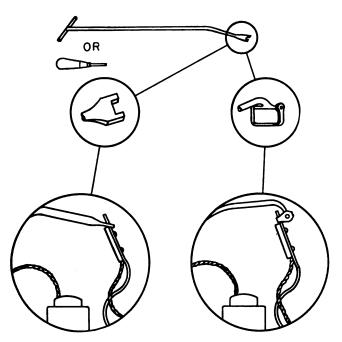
Lifting tools and how they are used on traction-motor brush springs
